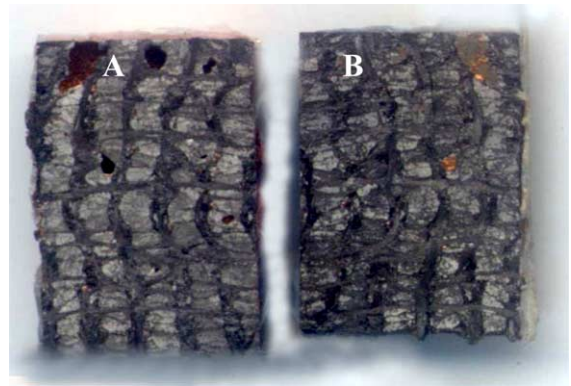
Fracture surfaces of a CFC NB31/Cu joined sample after mechanical shear test. A = copper side; B = CFC side: on both sides it is clear the presence of the composite.
